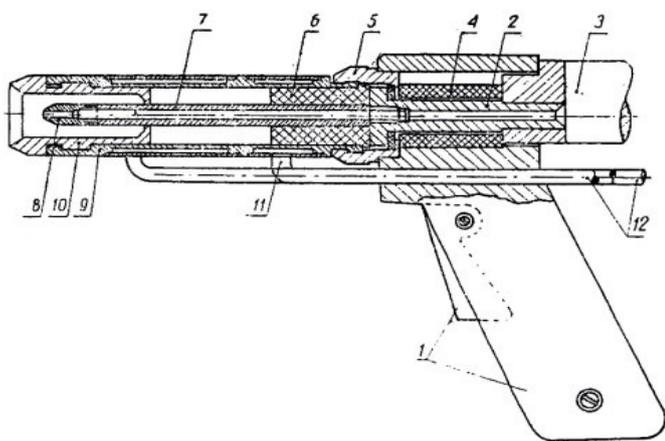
Schematic diagram presenting the CO₂-shielded welding torch designed at Instytut Spawalnictwa in Gliwice [33]
